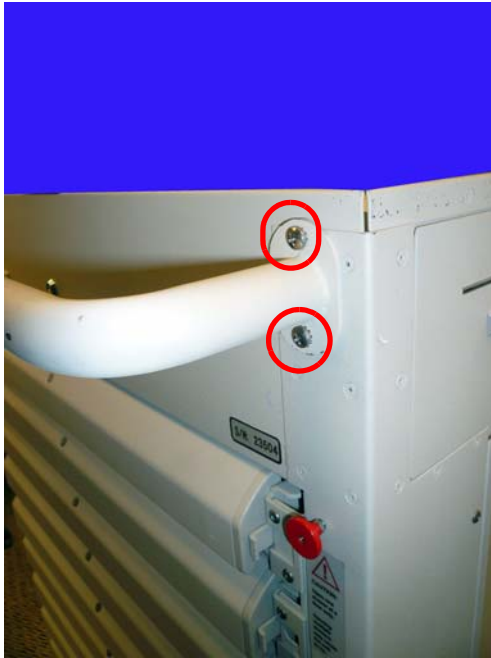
Remove the two screws that secure the front transport handle to the AWS frame
